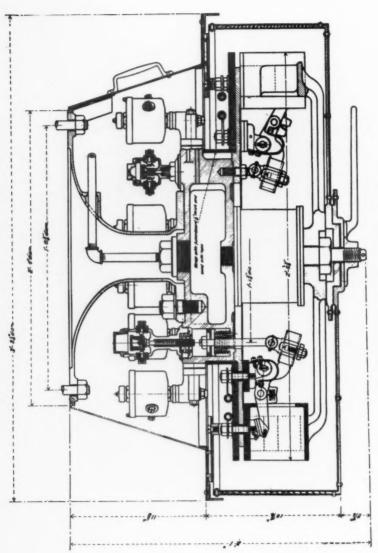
SECTION THROUGH TURRET CONTROLLER.
